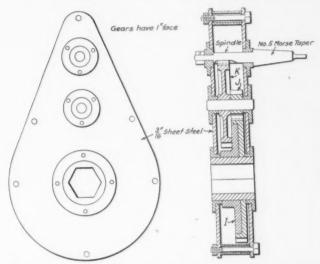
Gear Train Used in Pulling in Valve Chamber Bushings
